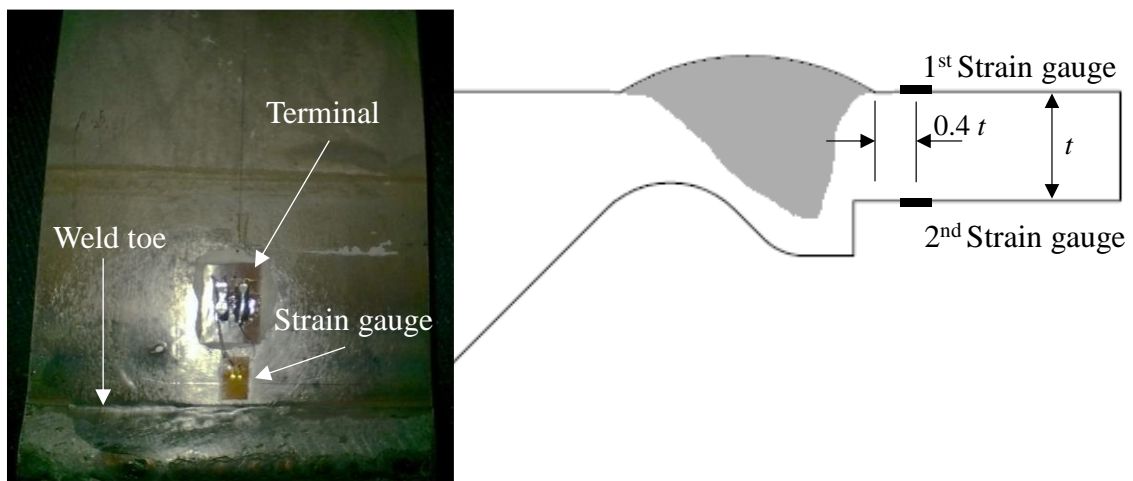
Strain gauge positions, each fatigue test specimen had strain gauge at the first position and a one specimen per series had gauge also on the second position. The strain gauge was glued at $0.4t$ distance from the weld toe and the terminal to which the wires were soldered was glued after that.
